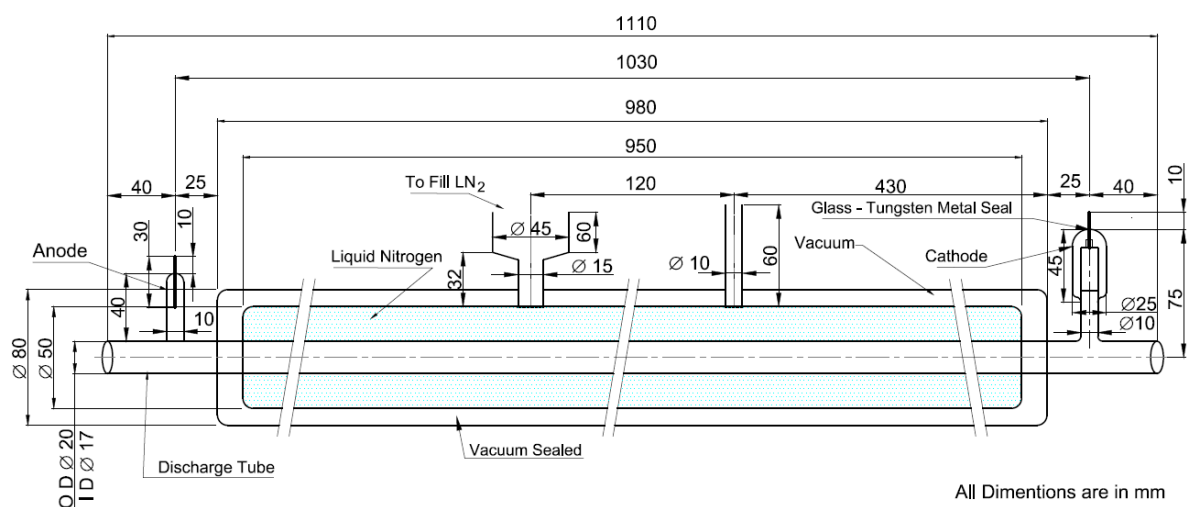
Auto CAD drawing used in fabrication of the CW-CO laser tube.
